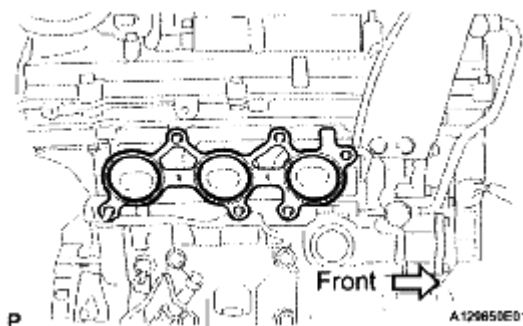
Identifying Exhaust Manifold Sub-Assembly RH Gasket
